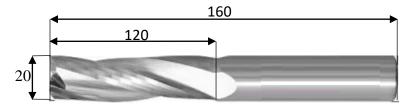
ITA Solid Carbide Cutter Z3 - D20x160xL120xS20 Right (Courtesy of ITA Tools)
